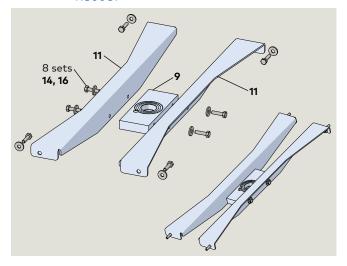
Canopy bracket and bearing assembly RS6087
